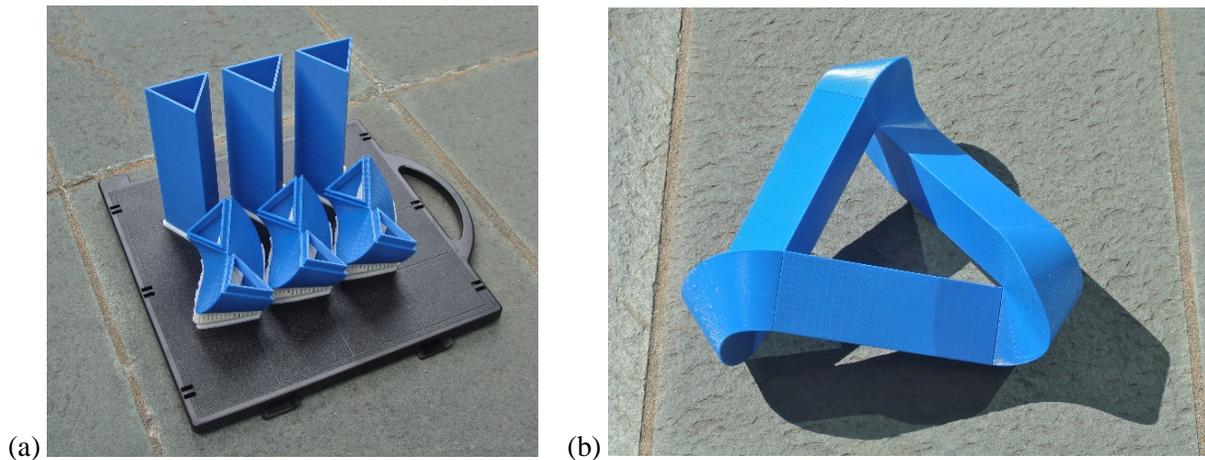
Fabrication of the first Bow-Tie loop: (a) one batch of six parts fabricated with FDM; (b) assembly of those six parts into a closed loop.
